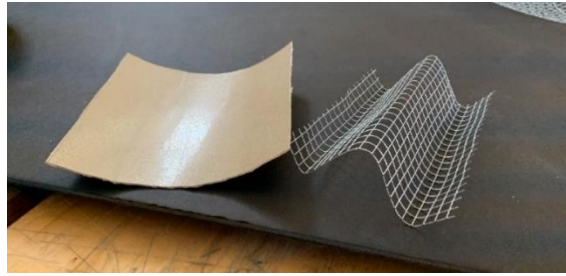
Unheated thermoplastic sheet with chicken wire mold.
